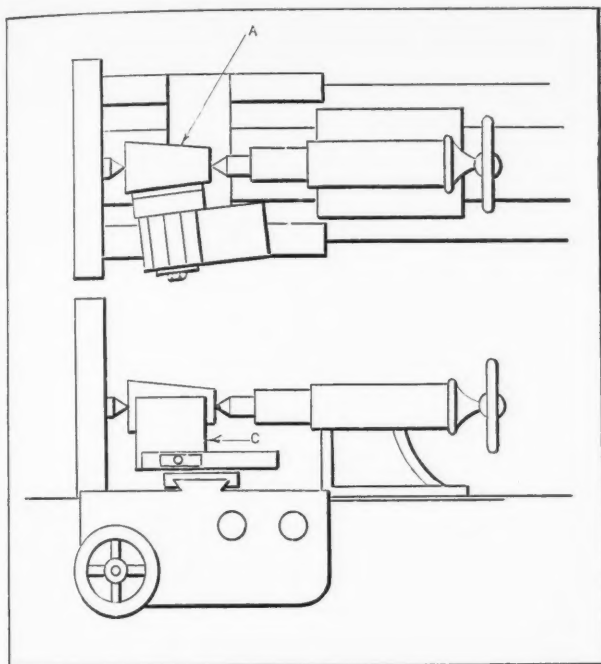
Method of Setting Compound Rest for Boring Ring Gage to Fit Taper Plug A
